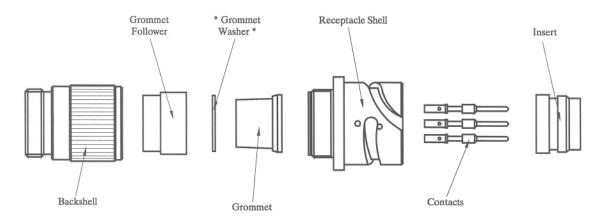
Exploded View of a Typical 'Plug' Connector
